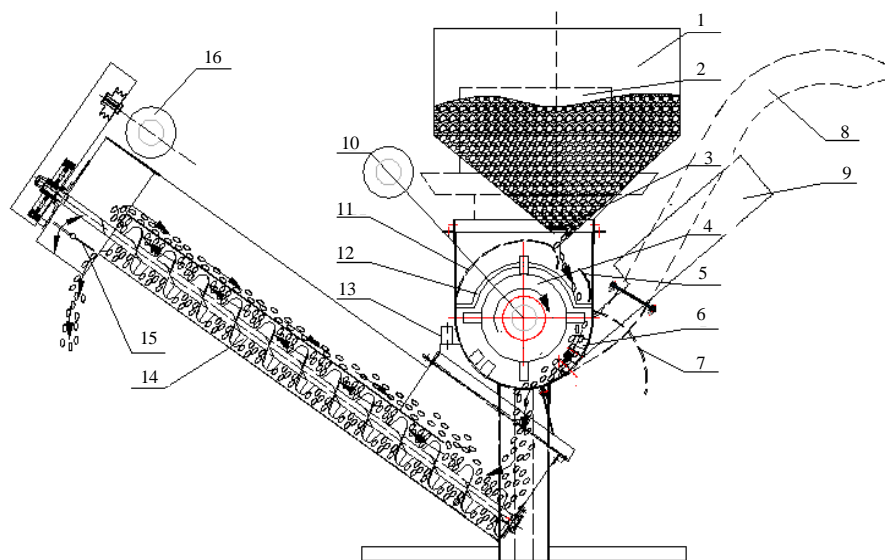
Scheme of universal small size feed-processing plant: 1-Grain bunker; 2-Hay bunker; 3-Damper; 4-Hammer rotor; 5-Rotor; 6-Deck; 7-Reflector; 8-Deflector; 9-Chute; 10-Rotor electromotor; 11-Cutter; 12-Lifter; 13-Frame; 14-Mixing screw; 15 -Screw damper; 16-Mixing screw electromotor
